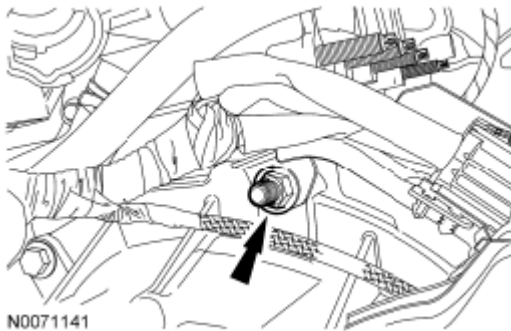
Locating HO2S And CMS Wire Connector Bracket Nut
